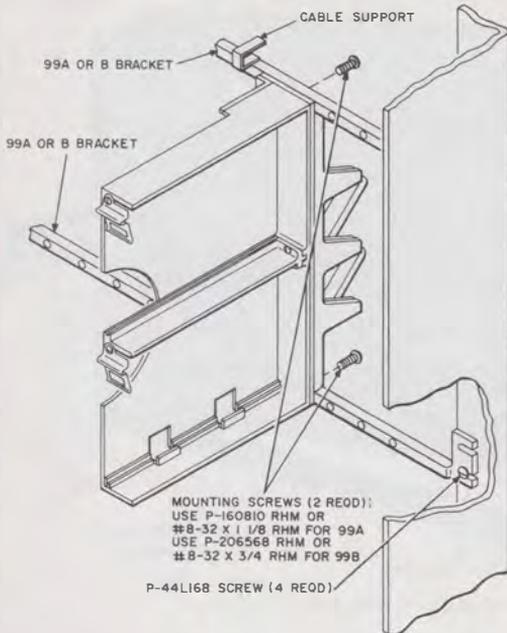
69-Type Apparatus Mounting on a 99A (MD) or 99B Bracket
